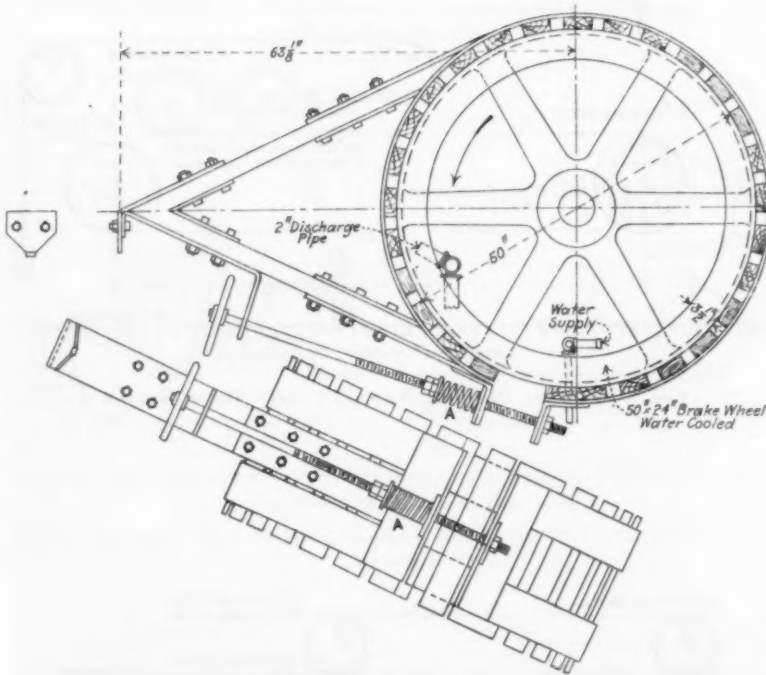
DETAILS OF PRONY BRAKE USED IN TESTS
